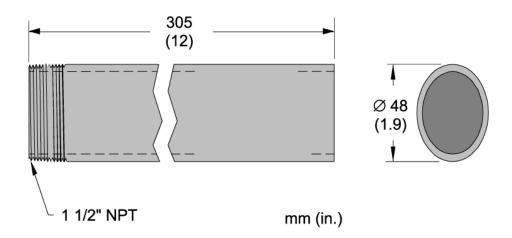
Carbon Steel Sighting Tube with 45° end cut (E-BEESIGHT)
